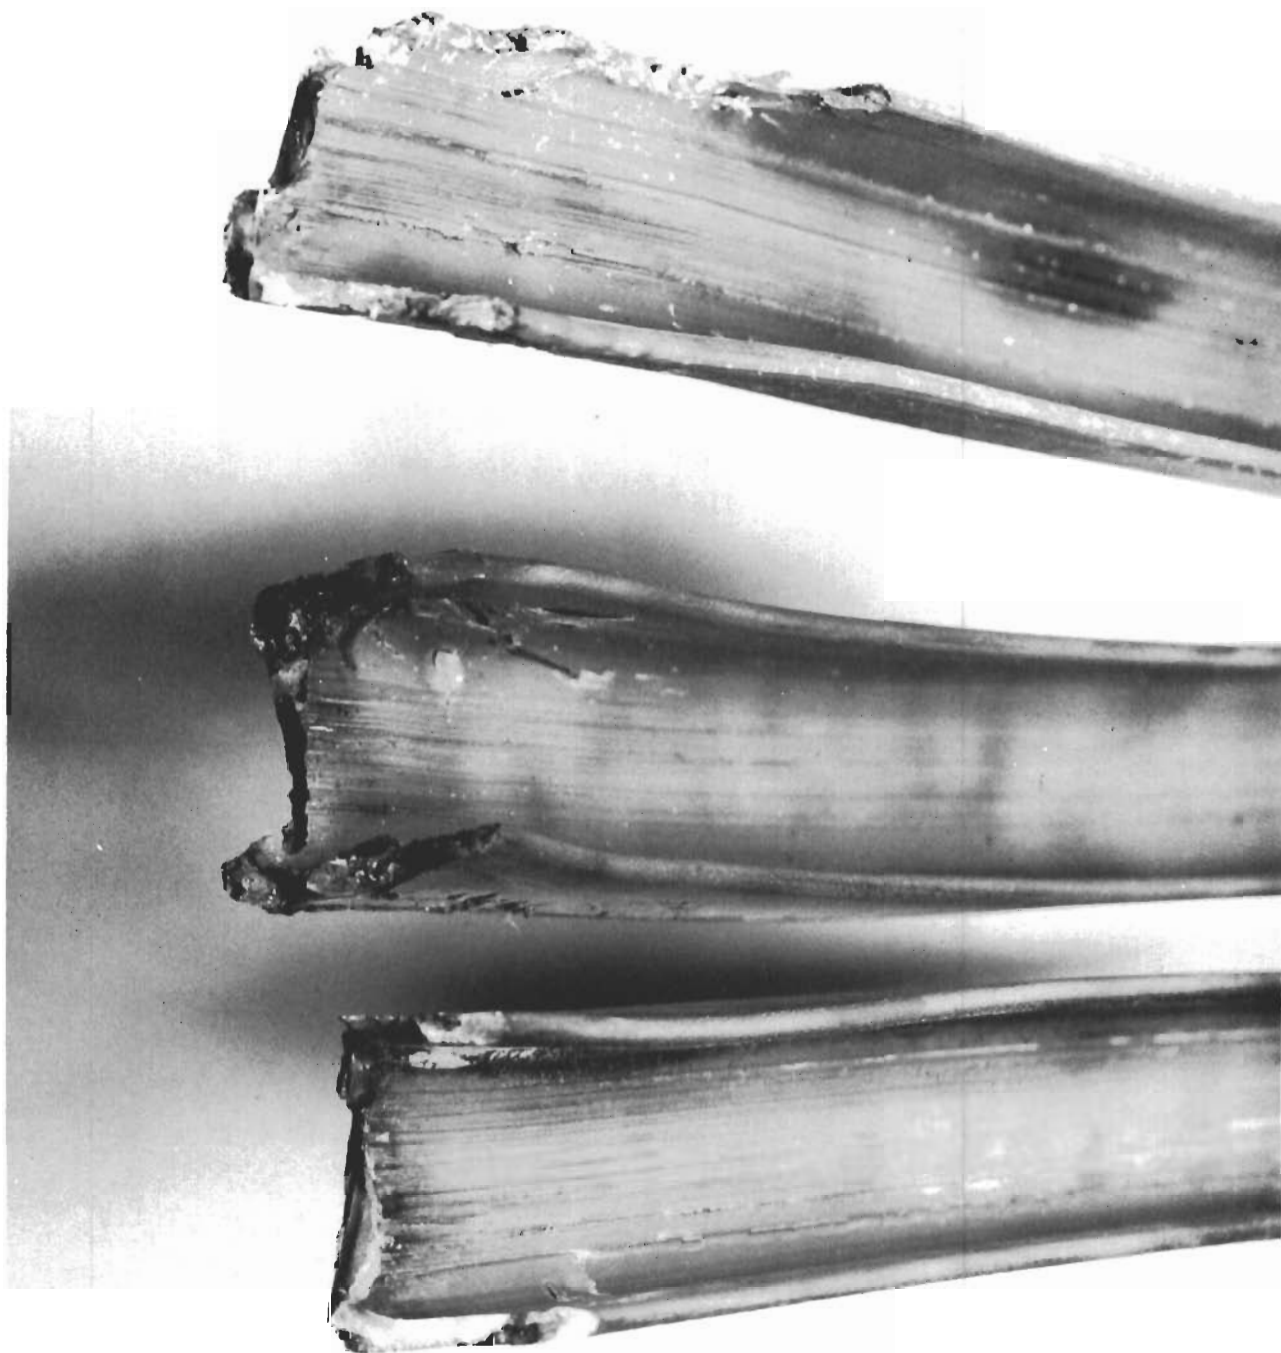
BUTT END, TOP VIEW, WOLVERINE BERYLLIUM EXTRUSIONS
